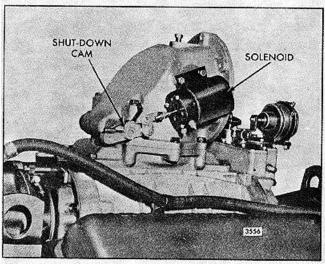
Solenoid Operated Emergency Engine Shutdown Device Mounting
